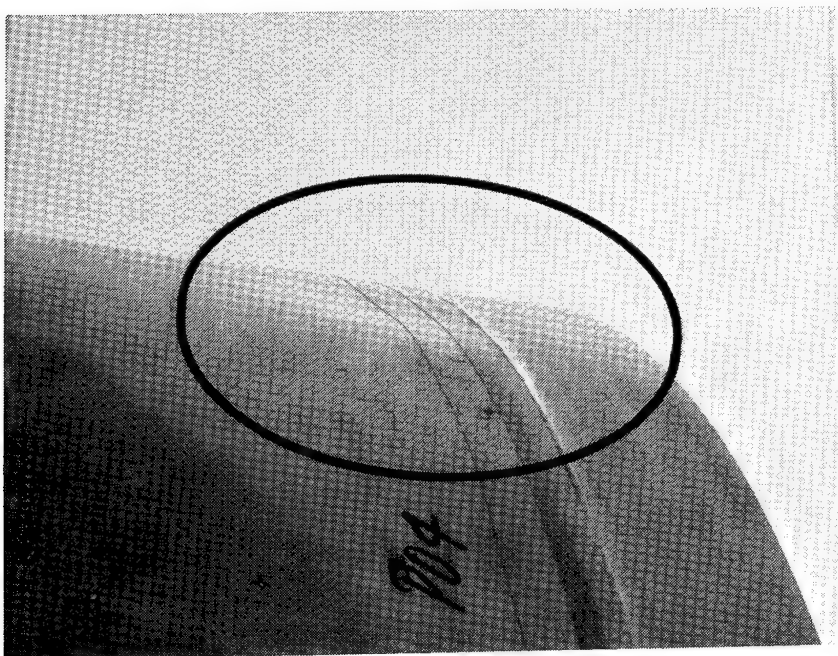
Cross Section of Wall from Completed Prototype Test Cylinder
